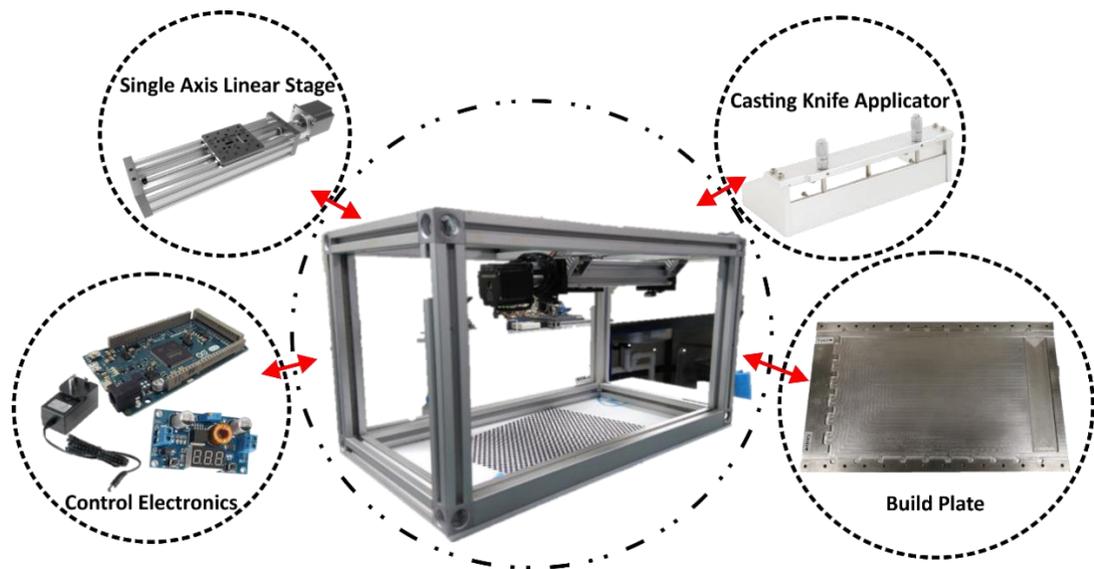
Overview illustration of developed bespoke applicator platform to assist development of SPIC fabrication with categorised components. Build of materials and expanded assembly of bespoke applicator platform is shown in Appendix 3.
